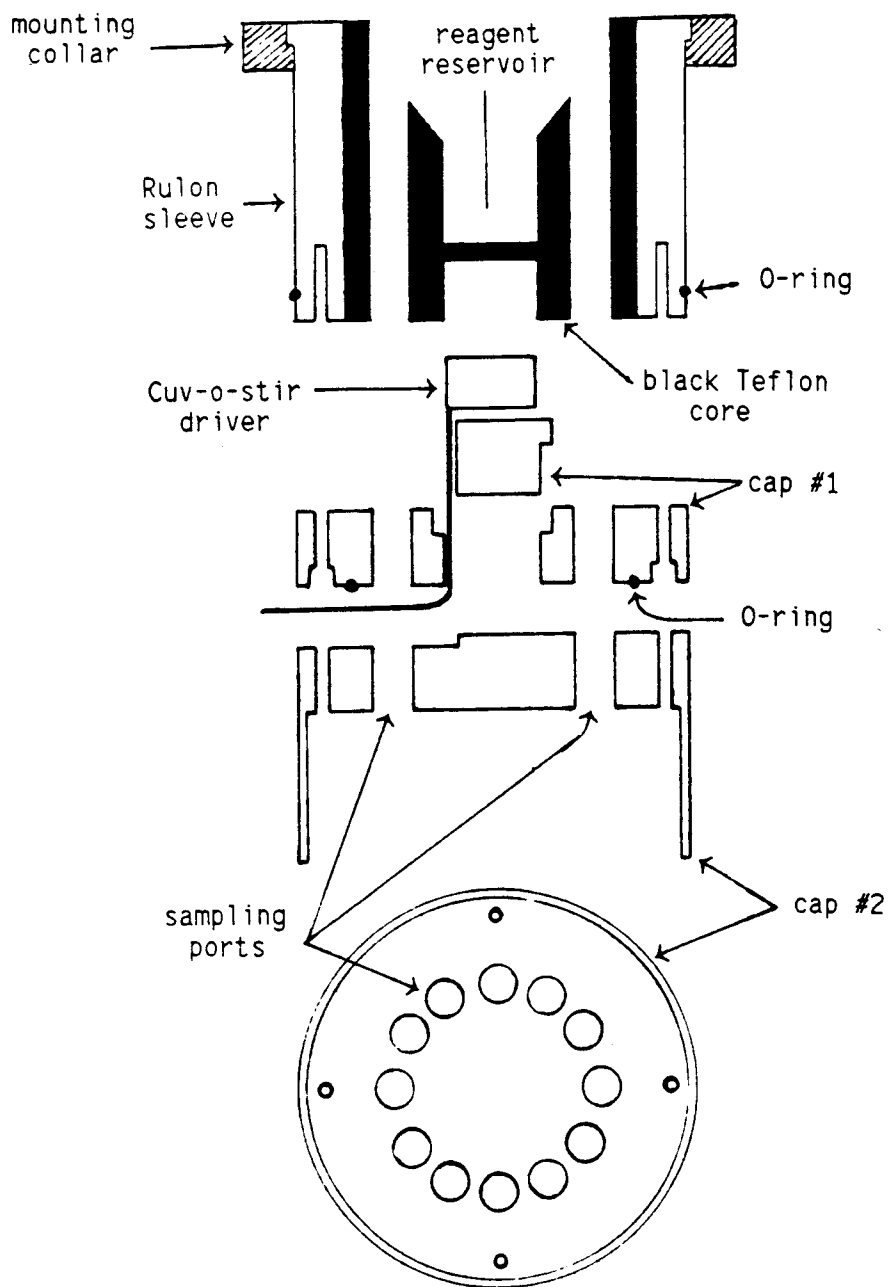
Exploded view of the reservoir FOCUS reactor.
